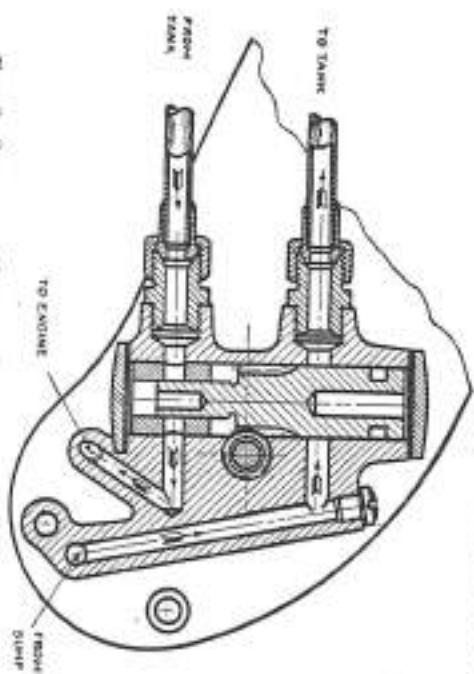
SCHEMATIC VIEW OF PIGEON MECHANICAL PUMP
